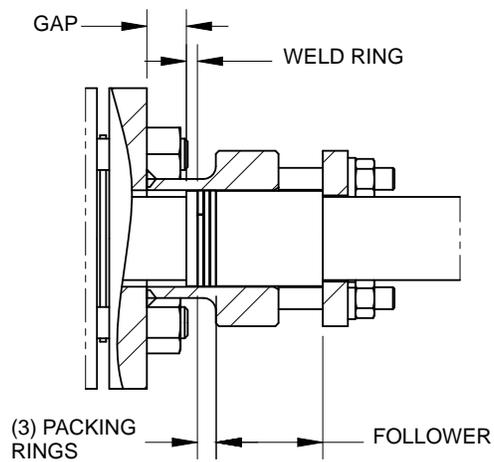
shows a view of the Flange-lok Annubar when installation is completed. Please note that there should be a gap between the Flange-lok Body and the Weld Ring.
